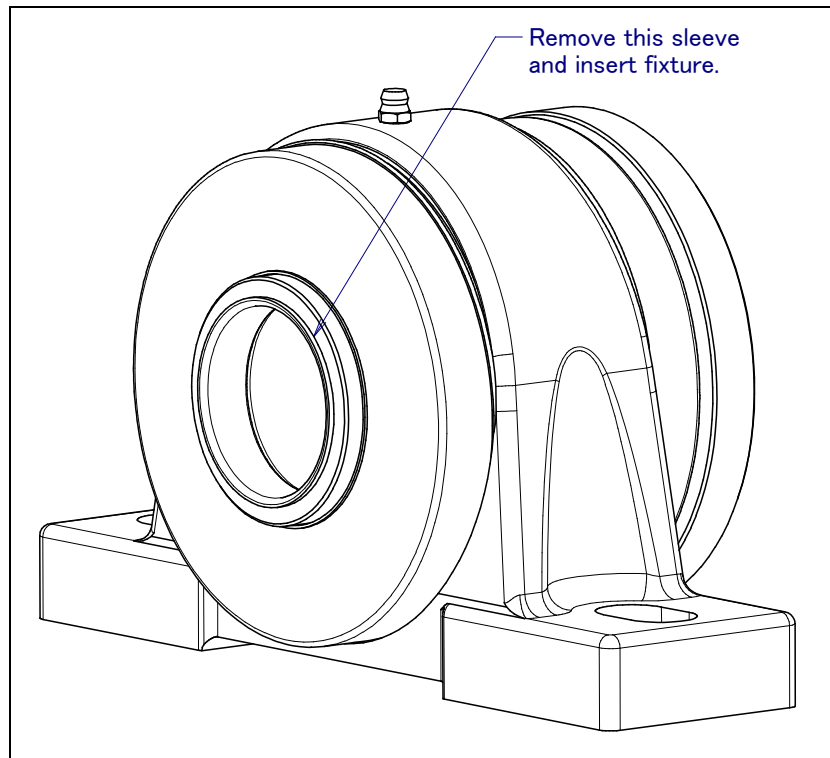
(t) Removing the sleeve of follower unit (non-insulated flange)
